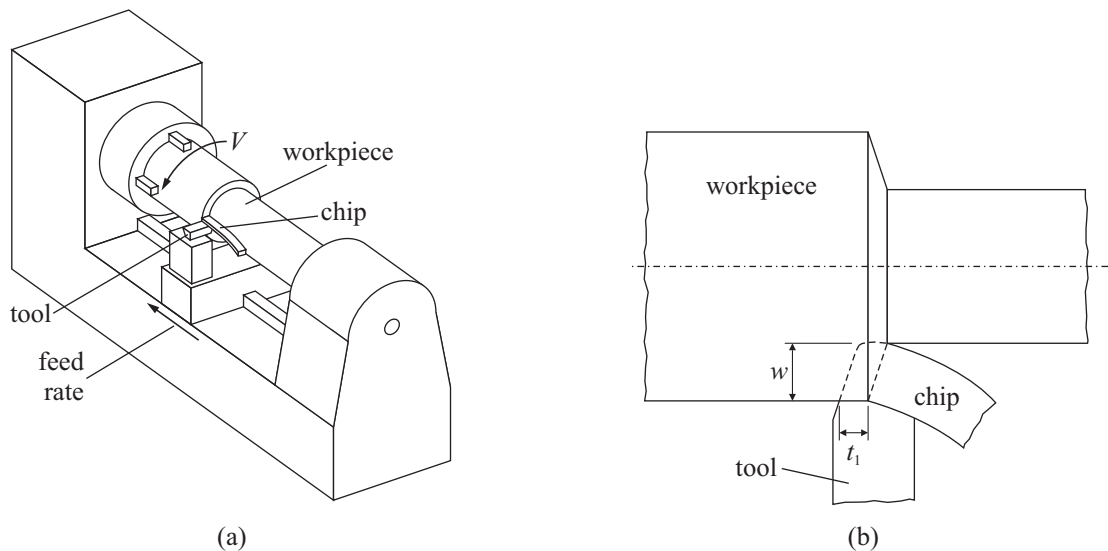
Turning operation. (a) Engine lathe. (b) Top view detail of the cutting zone.
